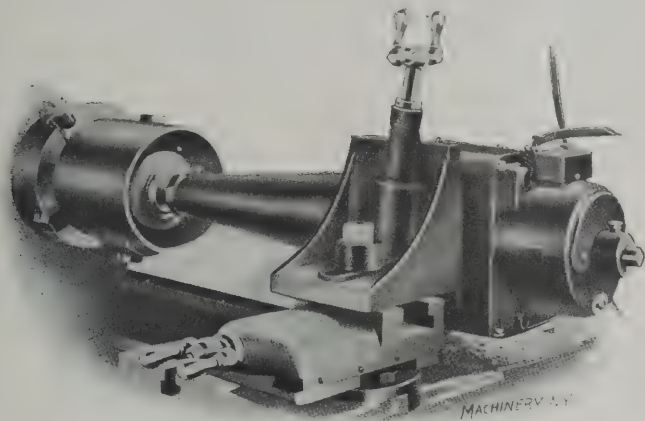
Lathe Grinding Attachment, with Extended Spindle for Internal Work
